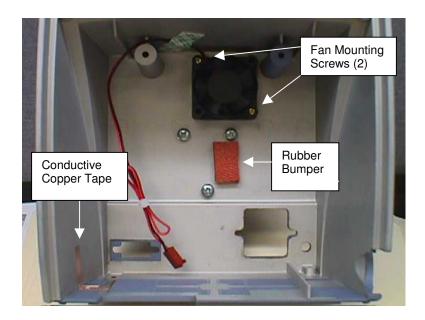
Updated System with 2 Fan Mounting screws and Copper Tape
